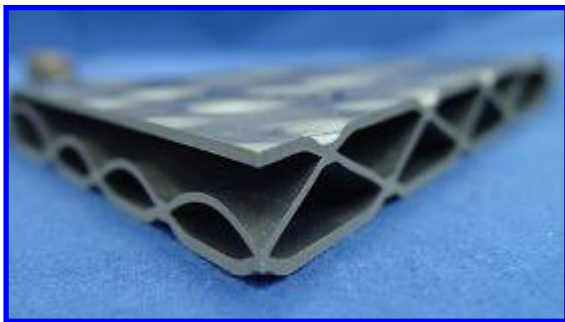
Two side cross section of a friction stir spot welded multisheet structure using die platens with a 1-in. standoff.
